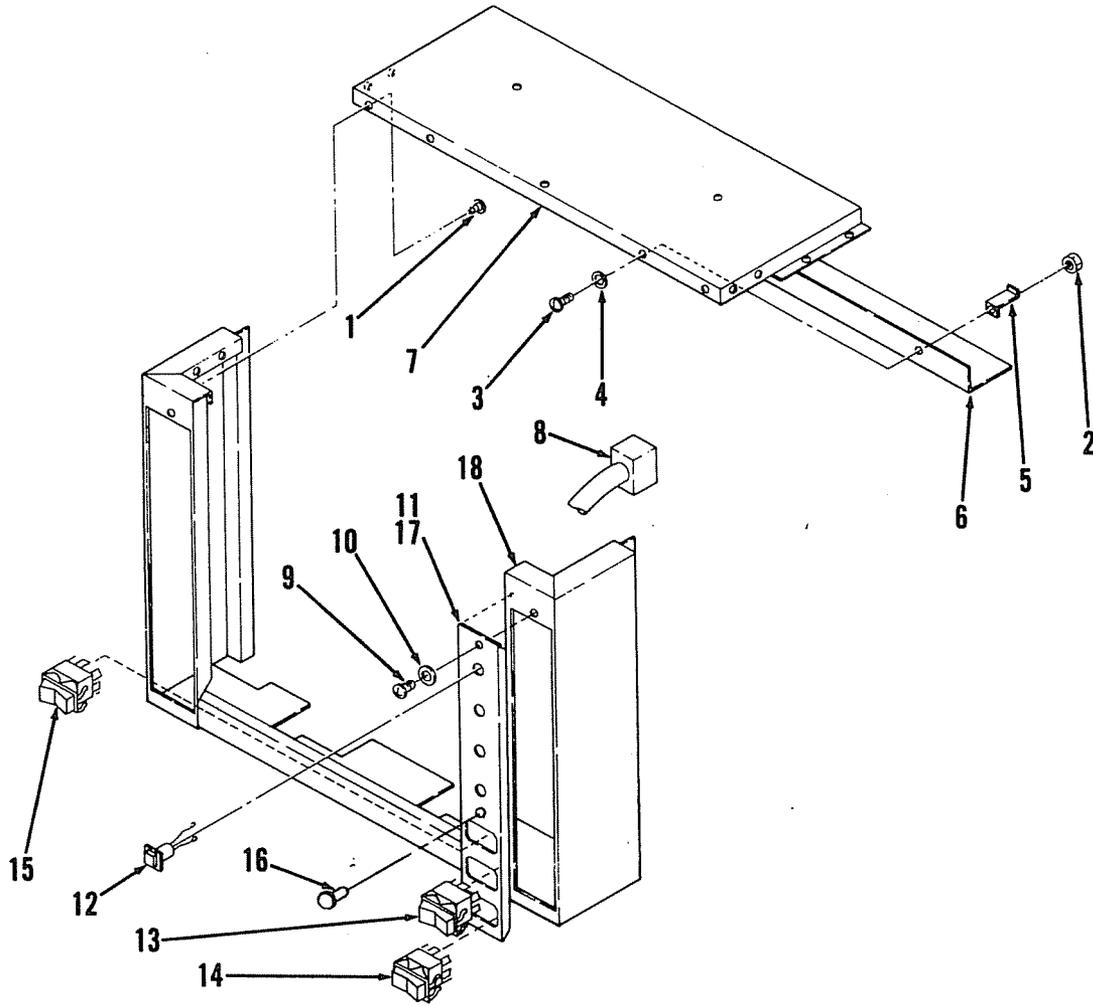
CONTROL PANEL ASSEMBLY
